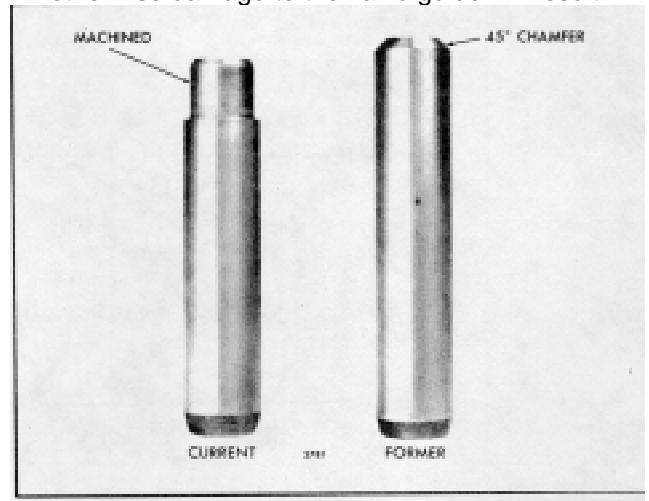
Former and Current Valve Guides Used in Cylinder Head
